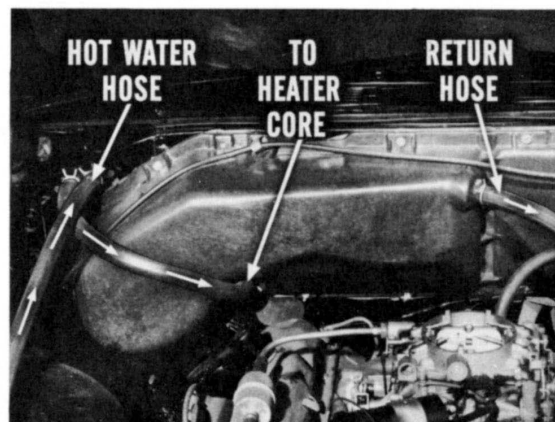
Chrysler, Imperial and Dodge Custom 880 heater hose connections
